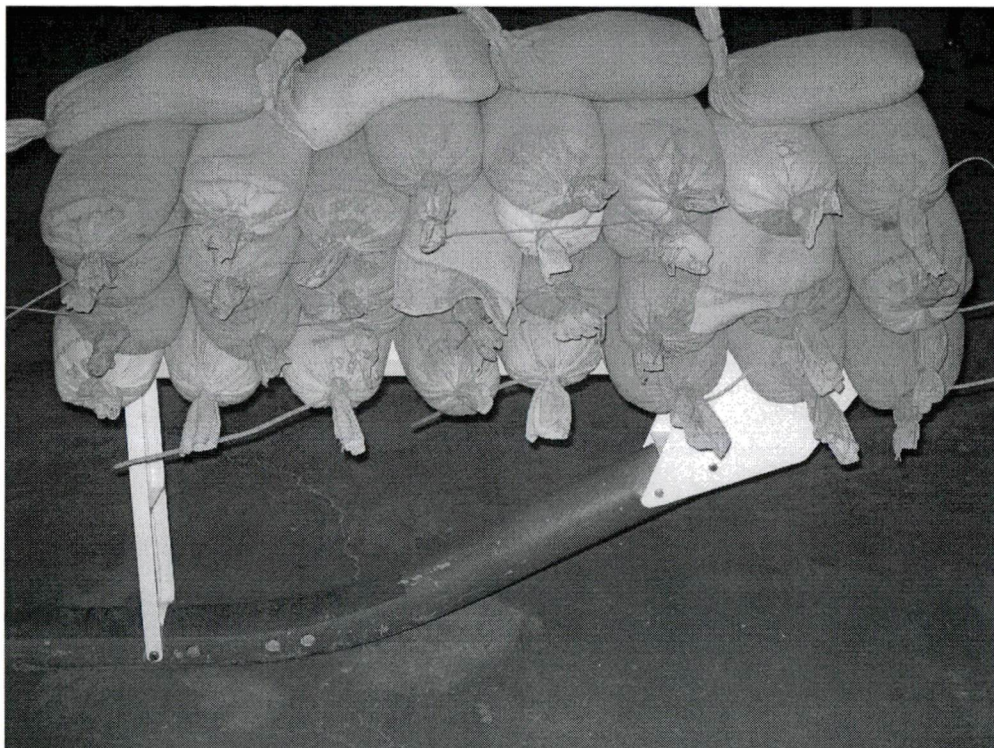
Ultimate Maneuvering Load on Short Step Assembly
